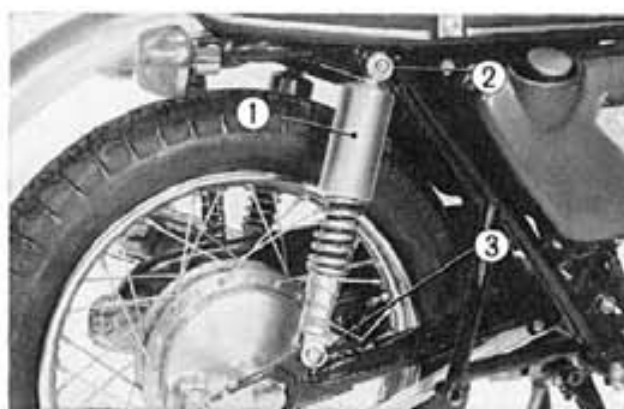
① Rear cushion ② Cap nut ③ Setting bolt
